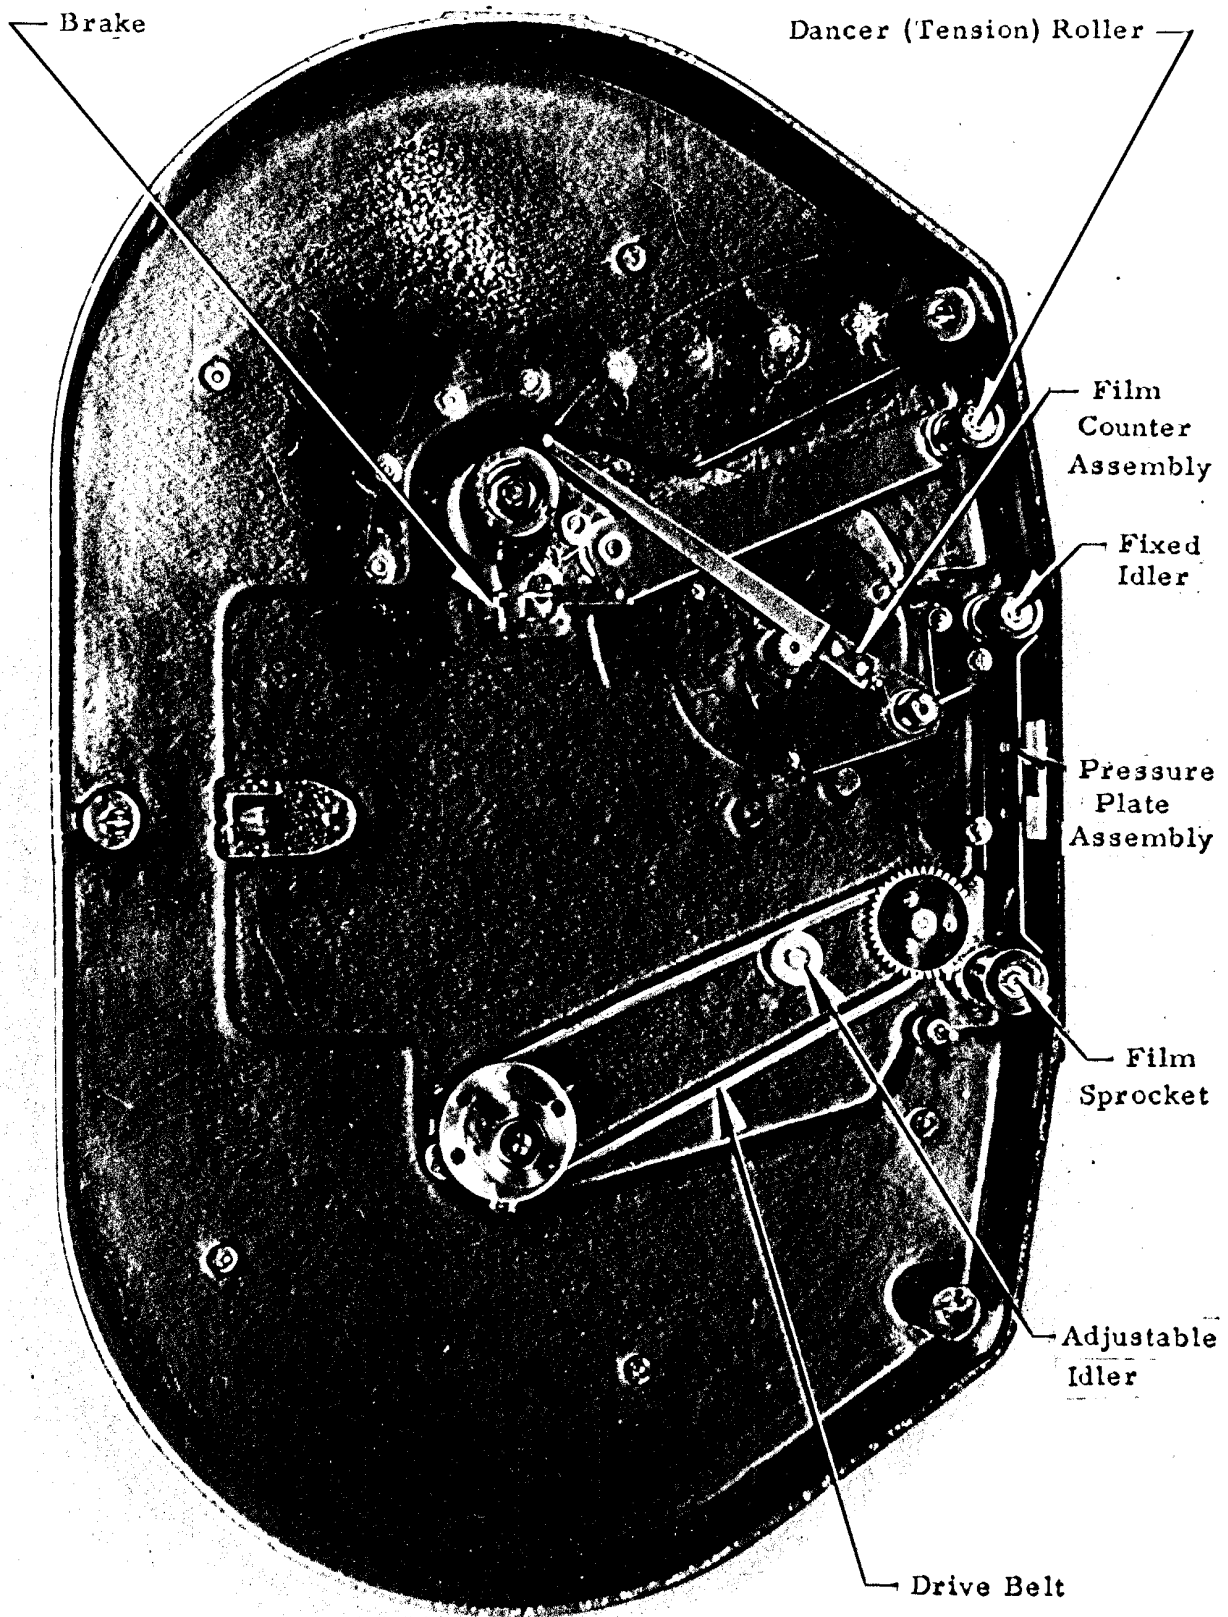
1000 FT. MAGAZINE WITH COVER PLATE REMOVED
